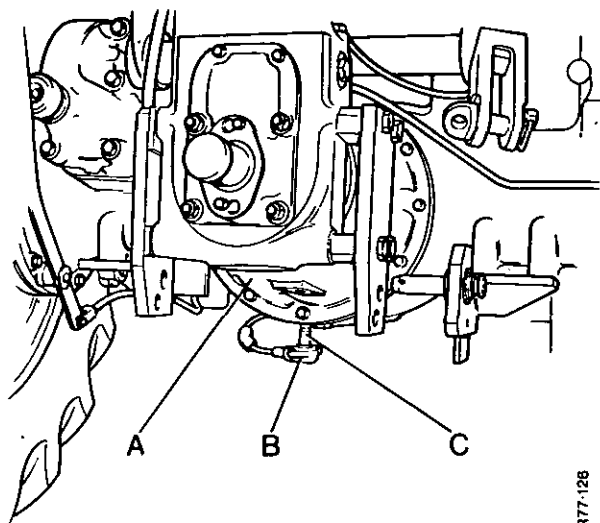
REMOVING OIL FILTER SWITCH ADAPTOR
